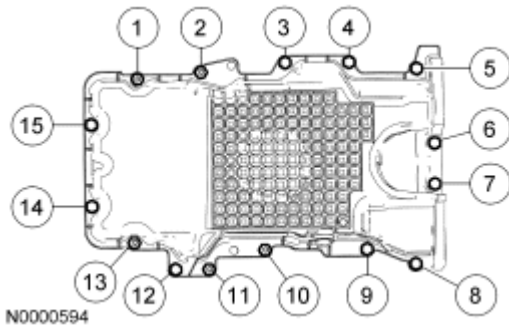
Identifying Tightening Sequence Of Oil Pan-To-Engine Bolts And Stud Bolts
